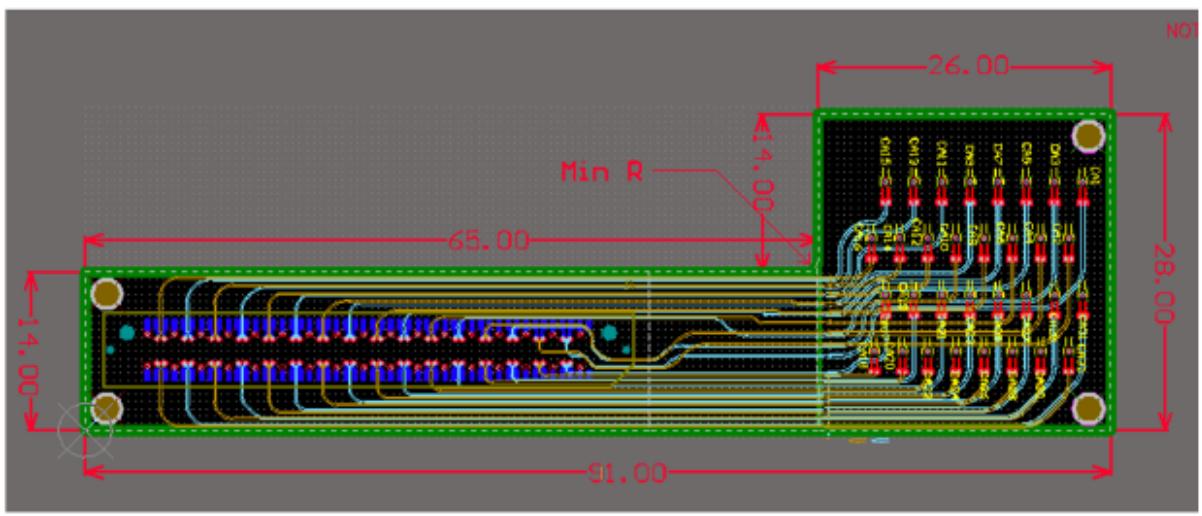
CAD drawing of the L-shaped Termination board designed at SLAC. The twinax cables will be soldered on the wide side of the board (rigid PCB); in the middle, the flex PCB allows for 90° bending along the Optobox (bending radius below 4 mm); at the other extremity, along the narrow side of the board, a stiffener is added to the flex PCB in correspondence of the ERF8 connector to the Optoboard.
